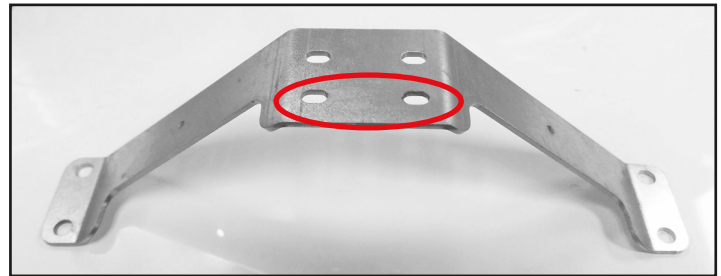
For similar brackets, see left for instructions. Front mounting holes circled.
